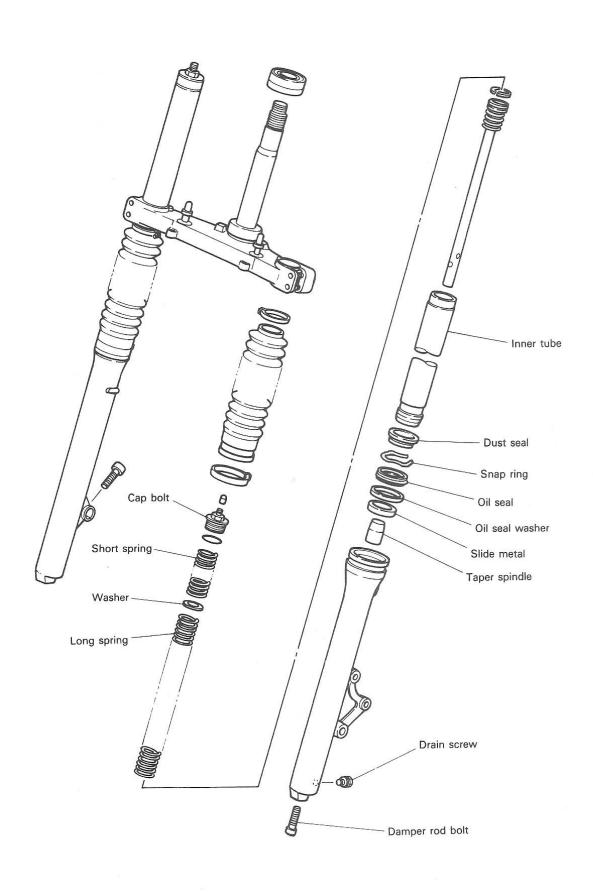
YTZ 250 fork components - exploded view (Sec 5)
